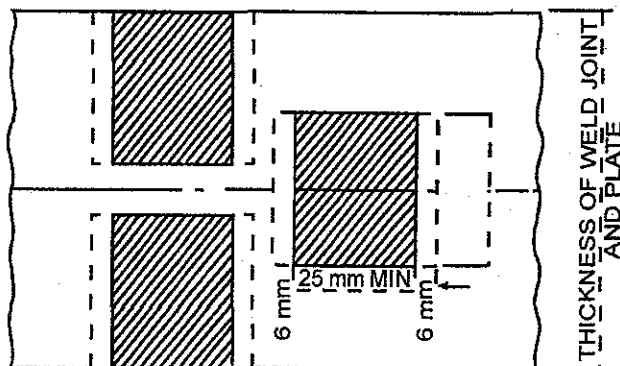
B — REDUCED SECTION TENSILE SPECIMEN IN THICK PLATE
